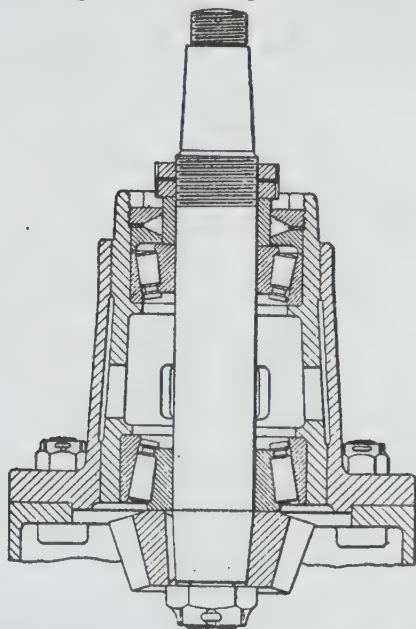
PINION SHAFT MOUNTED IN CONICAL ROLLER BEARINGS.
